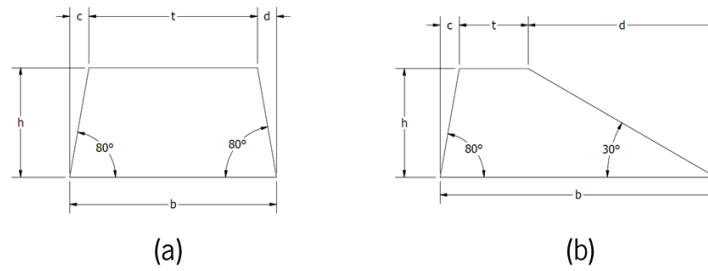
Runners profiles. (a) - Fan; (b) - Tangential runner with 30°C approach (adapted from [6]).
